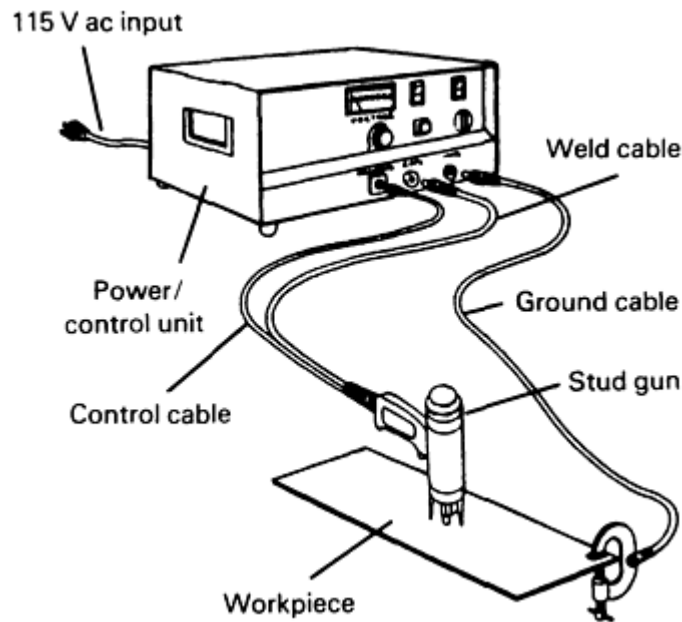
KEY COMPONENTS OF A PORTABLE CAPACITOR DISCHARGE STUD WELDING SYSTEM
